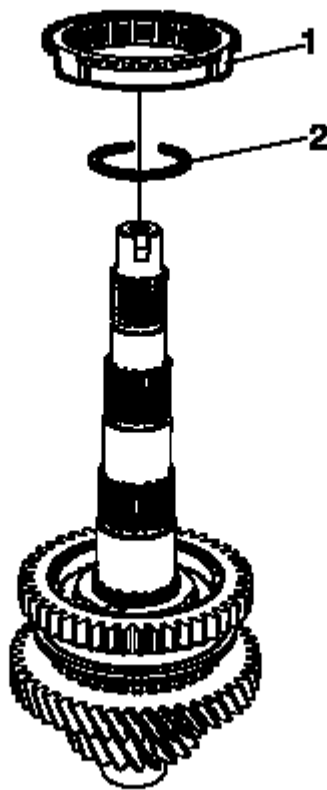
1st-2nd Gear Synchronizer Circlip
